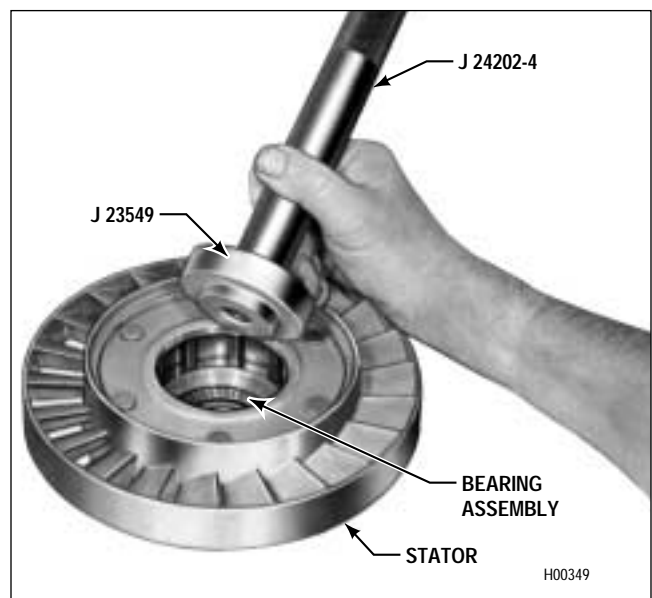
Installing Stator Thrust Bearing (AT 543)
